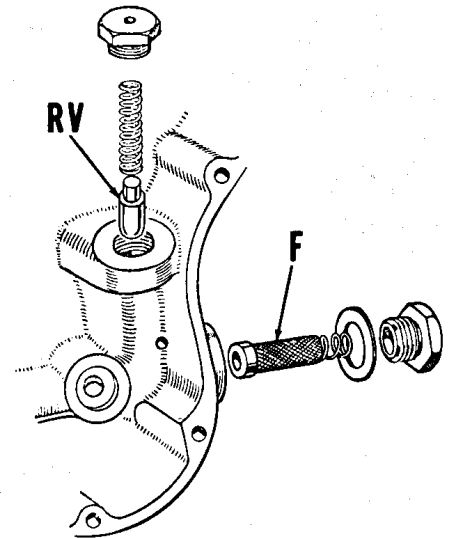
View of oil pressure relief valve (RV) and engine oil filter (F) used on model 650ss. Filter can be removed without removing timing cover; relief valve can be removed after removing timing cover.
